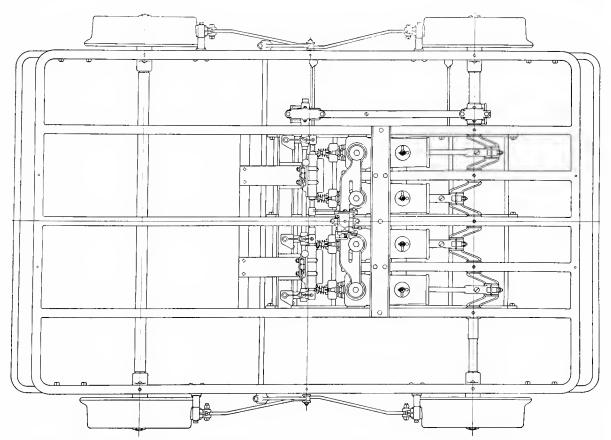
Frame and Driving Mechanism of Rockford Motor Car No. 5 Chicago Pneumatic Tool Company.
